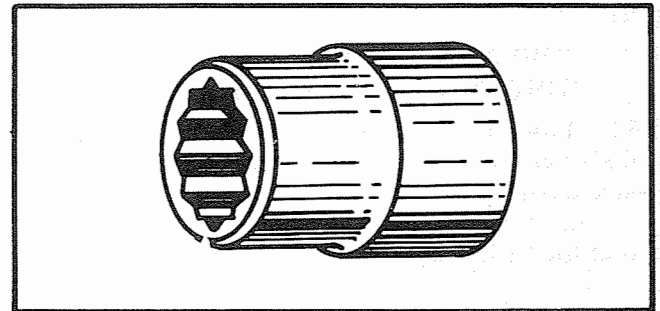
Oil Pressure Relief Valve Cap Socket Wrench
